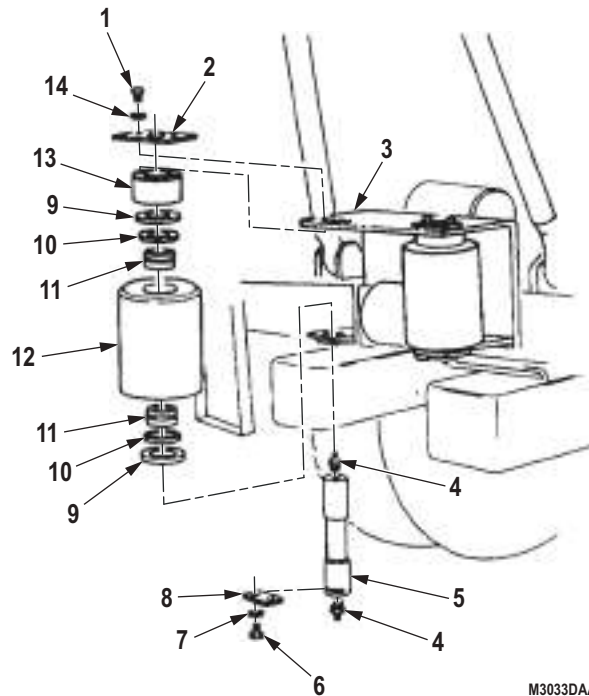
Rear Winch Roller Repair - Side Roller Disassembly.
